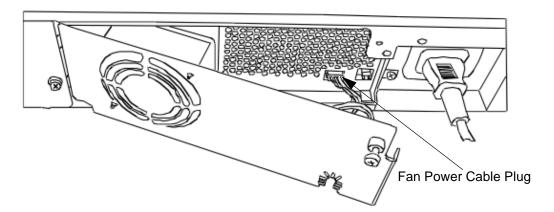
Opening Chassis Access Panel (19" Chassis)
